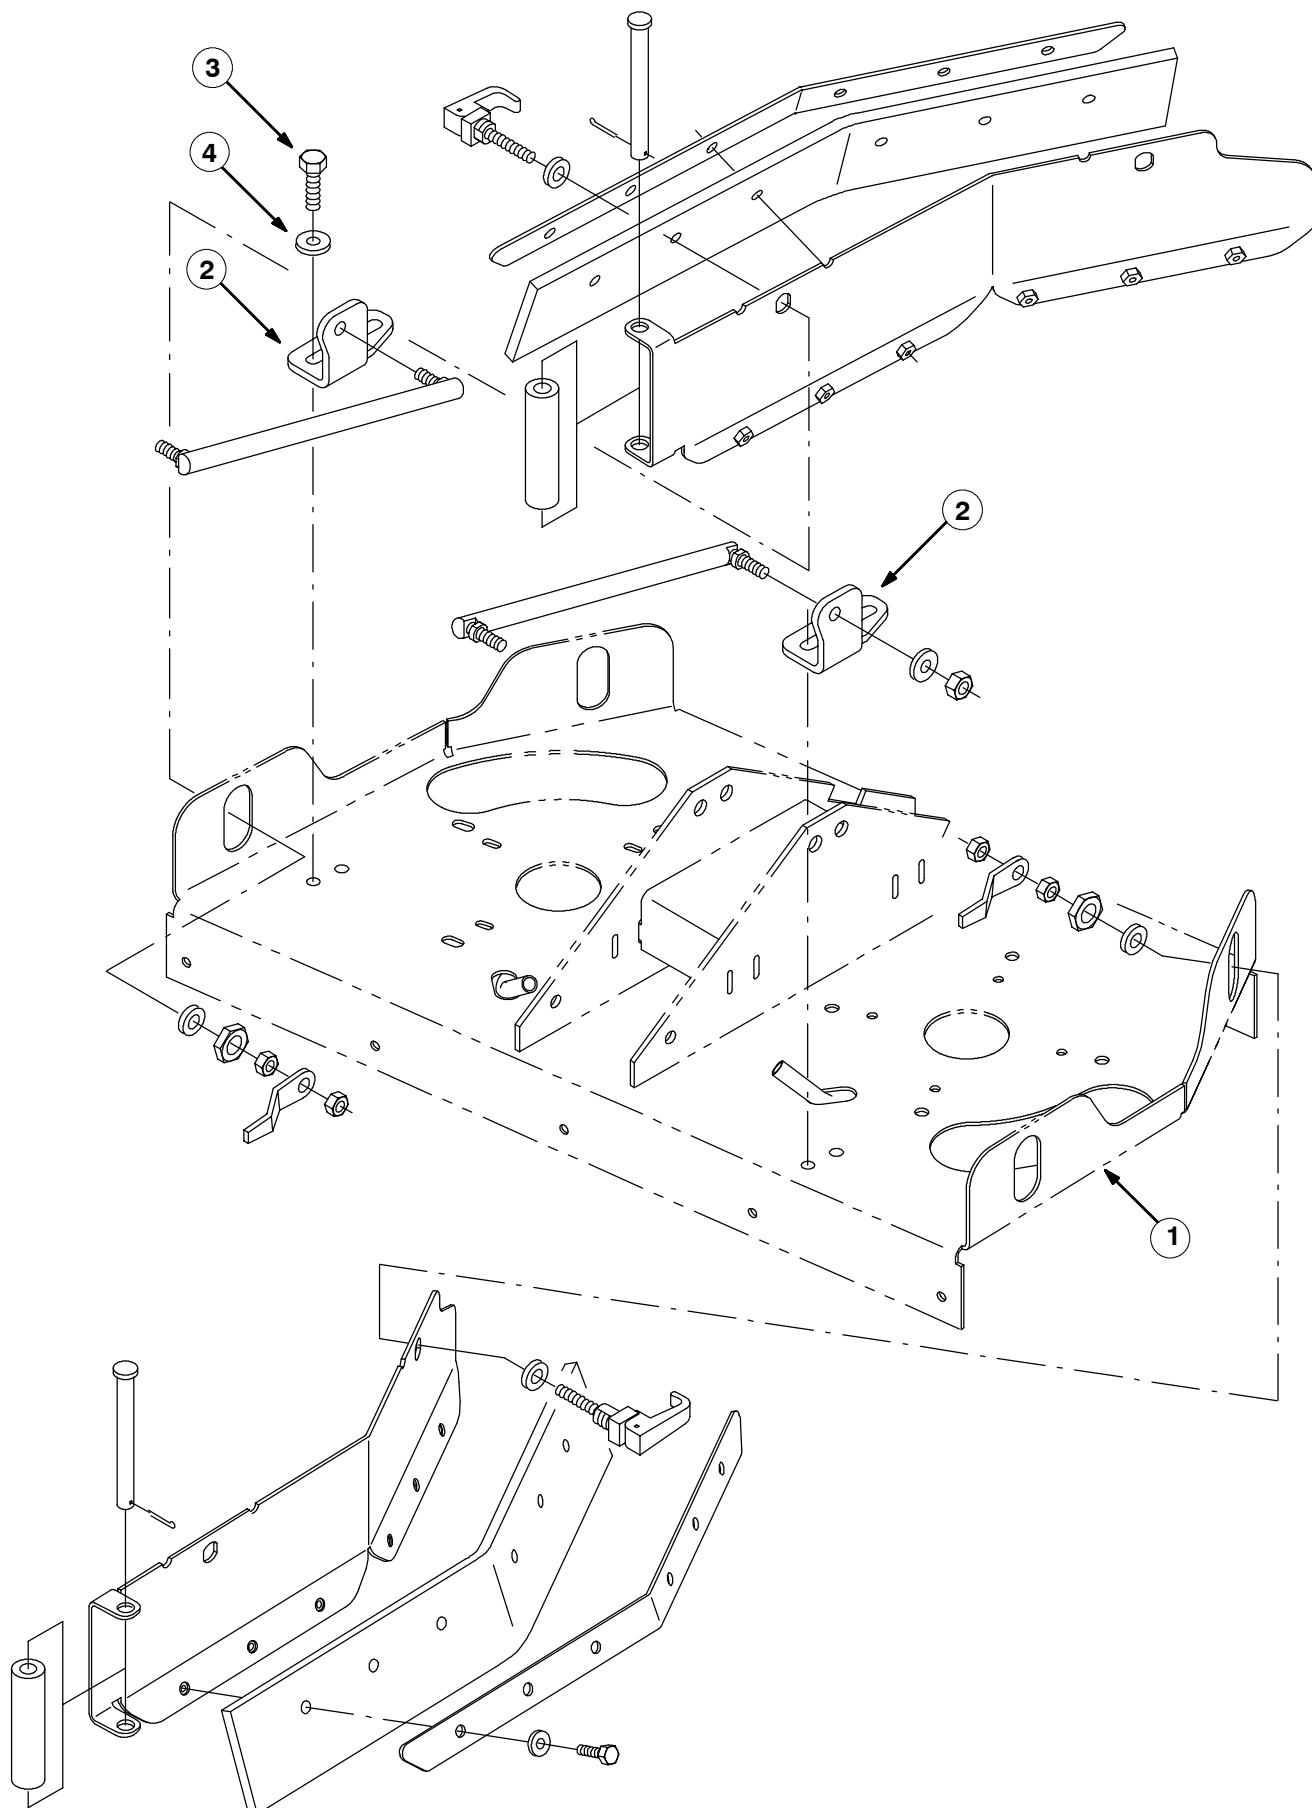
Disk Scrub Head Linkage and Squeegee Group 700 mm (28 in)
